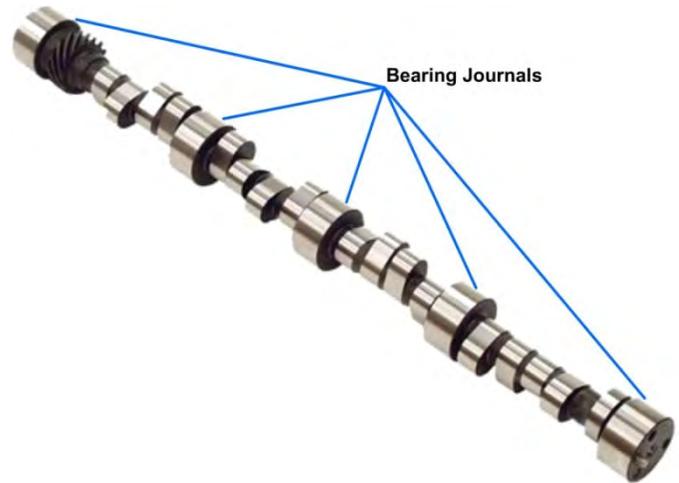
Camshaft with bearing journals in a V-type engine.
